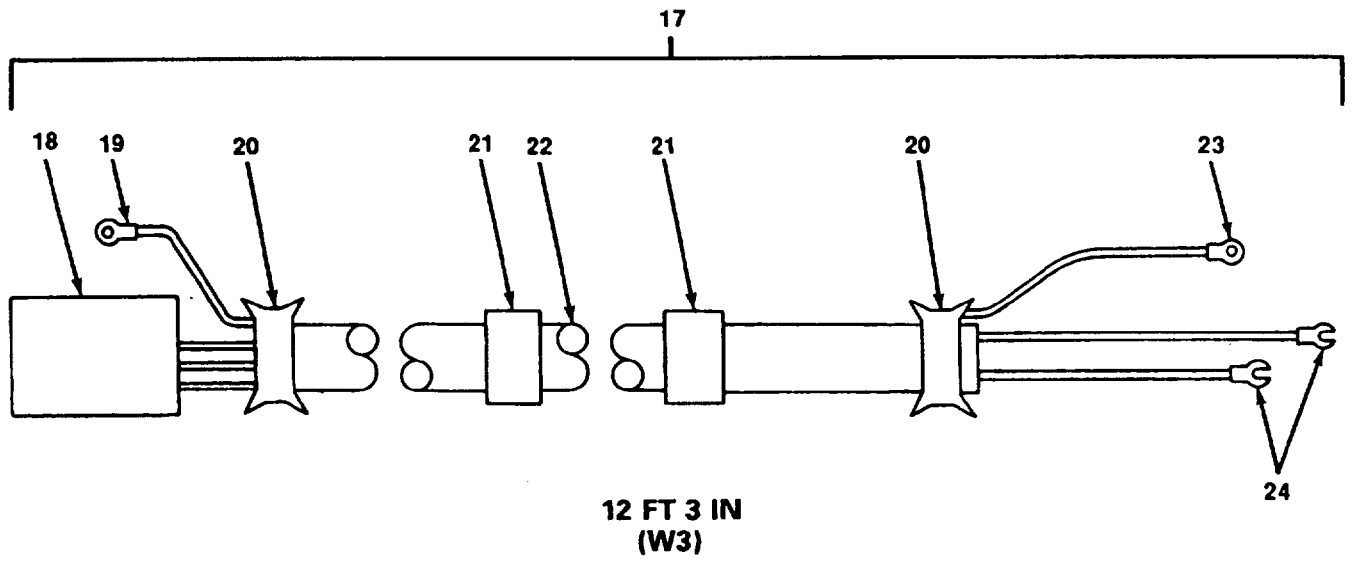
Cable Assemblies W1 through W6 (Sheet 1 of 3).
